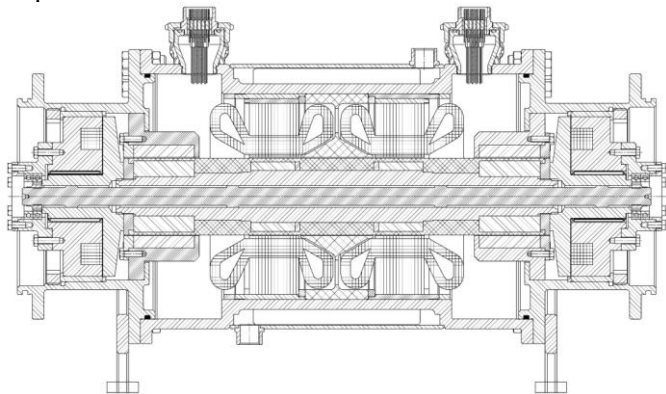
Layout of the magnetic suspension with radial PMB and axial AMB
